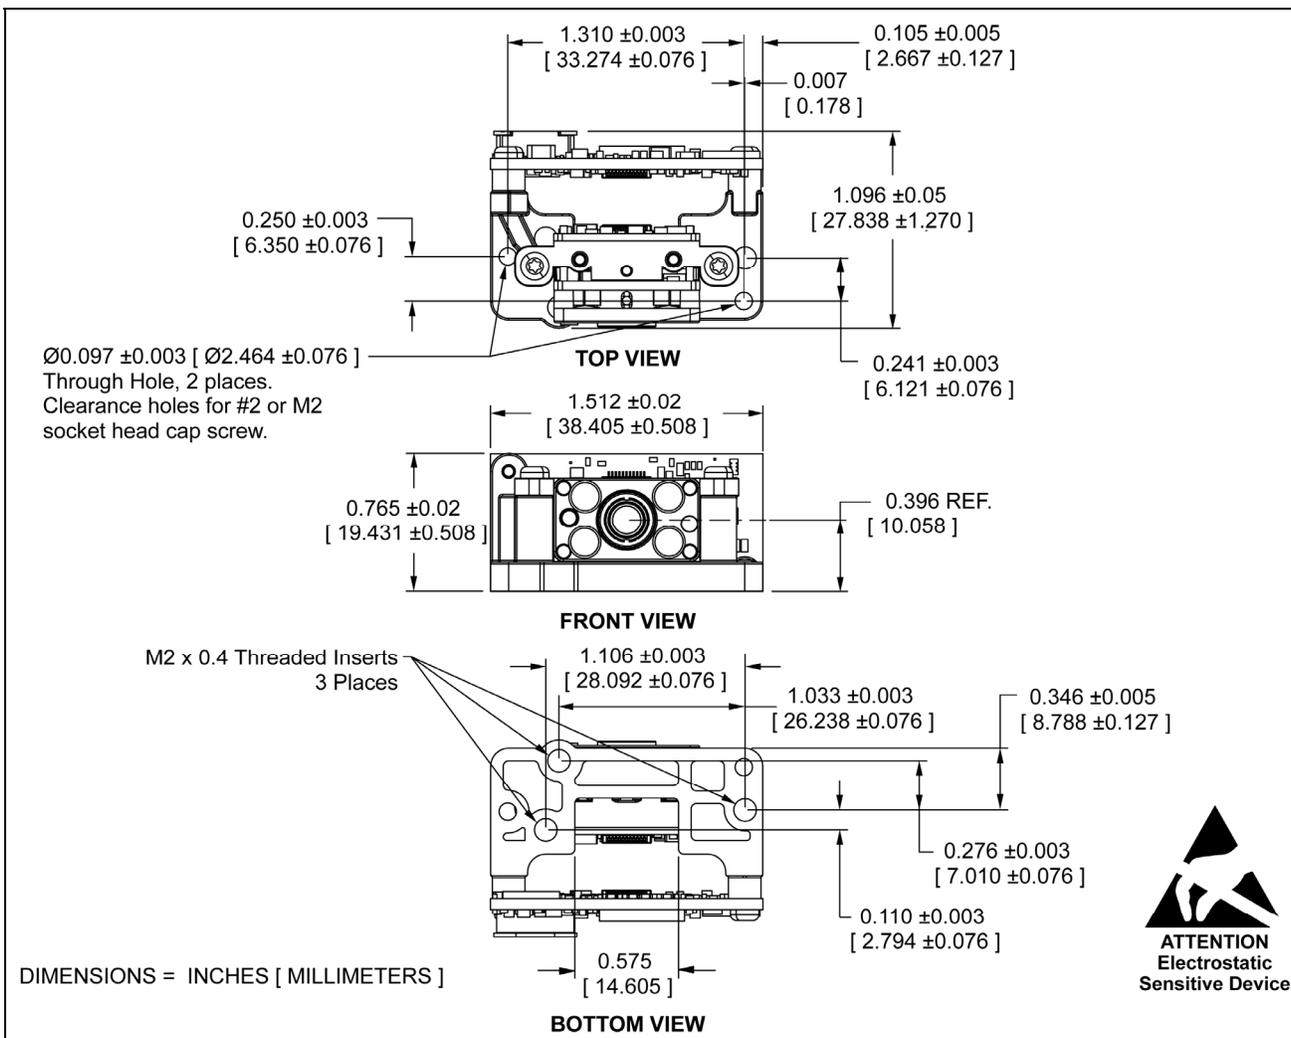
IS4920 / IS4921 Bracketed Decode Engine Dimensions
